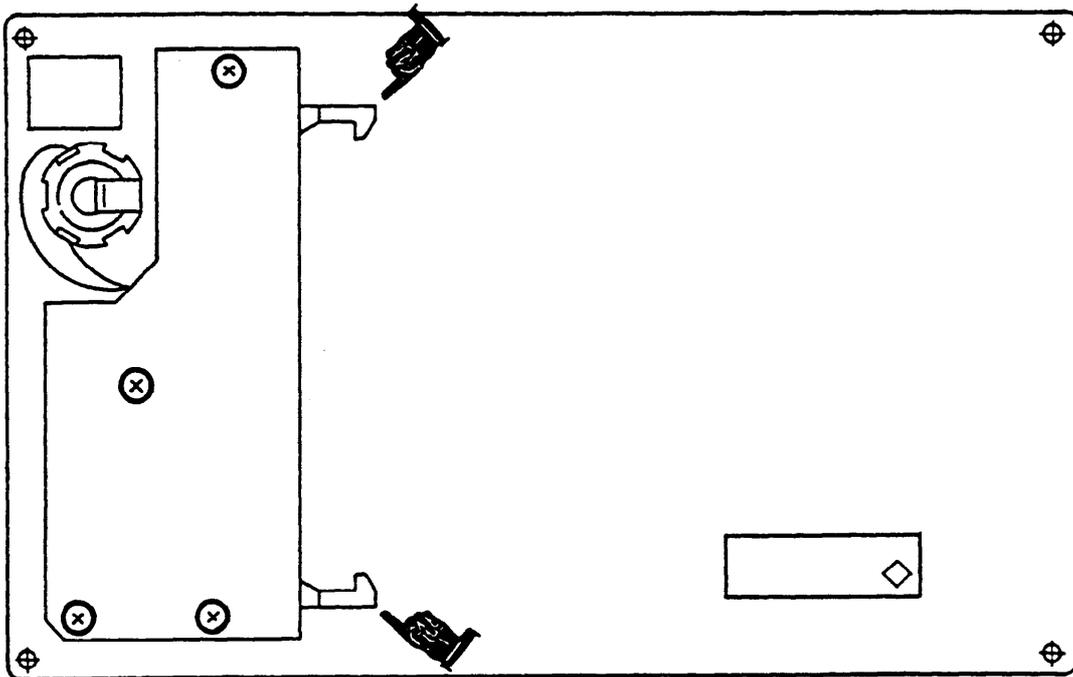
Location of Connector X20 (Control Unit 1)
